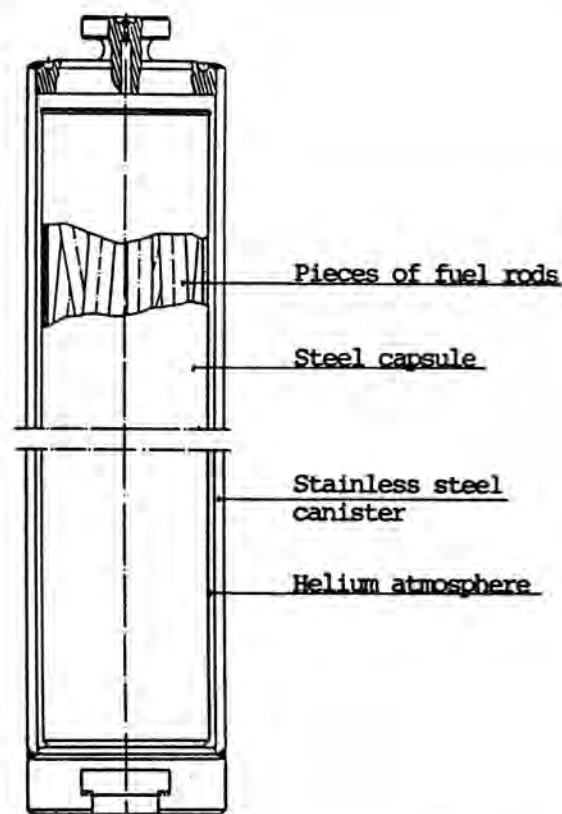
Stainless Steel Canister for Encapsulation of Fuel Residues.
